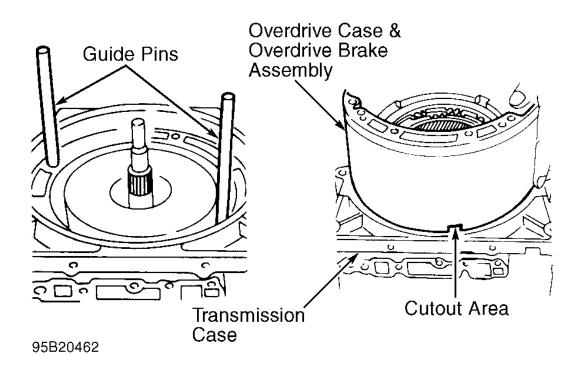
Installing Overdrive Case & Overdrive Brake Assembly Courtesy of ISUZU MOTOR CO.
